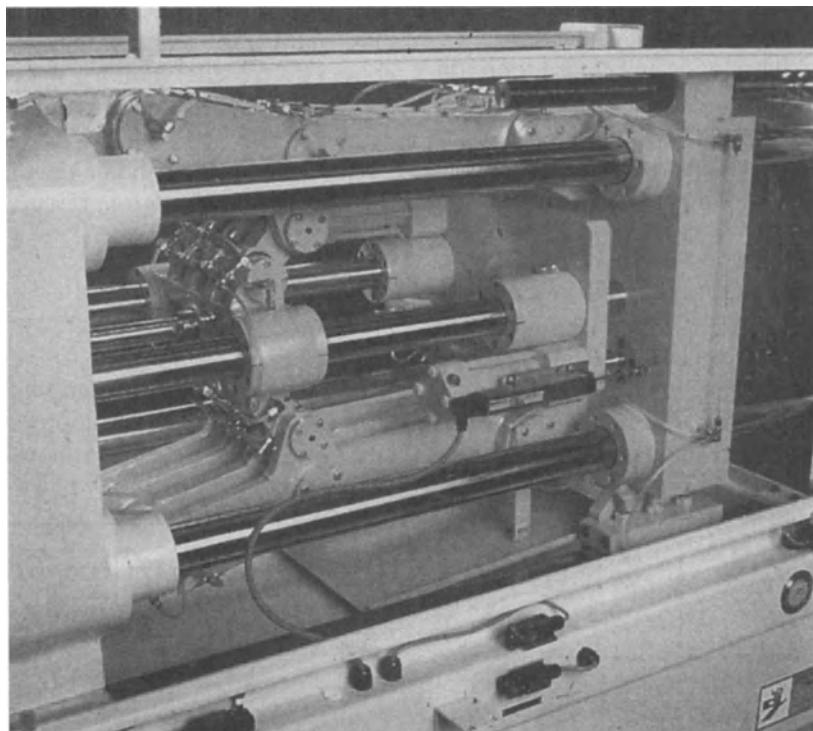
Example of a universal 60- to 560-ton toggle-clamping IMM series (HPM).
